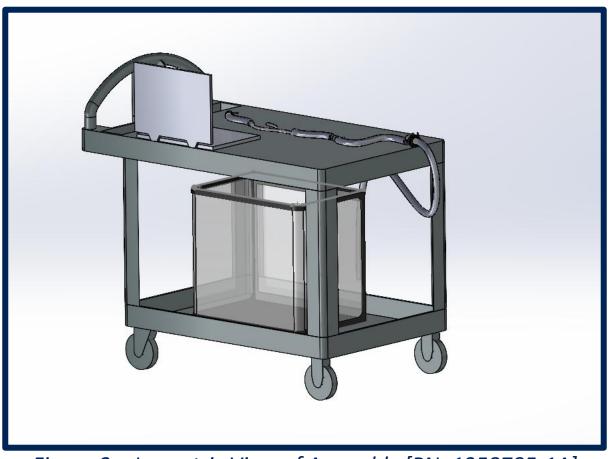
Isometric View of Assembly [PN: 1358785-1A]
